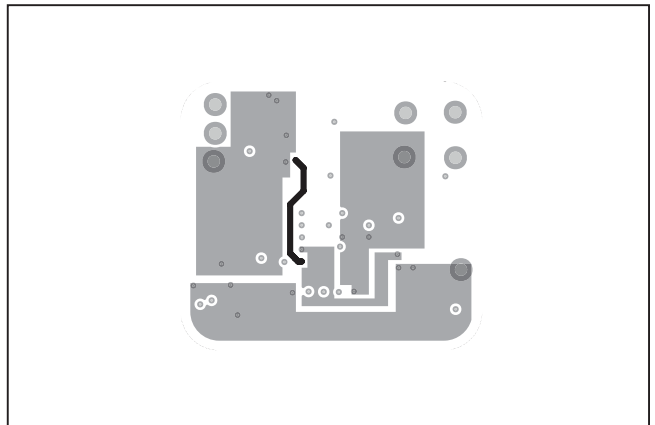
MAX30102 Daughter Board PCB Layout—Component Side
